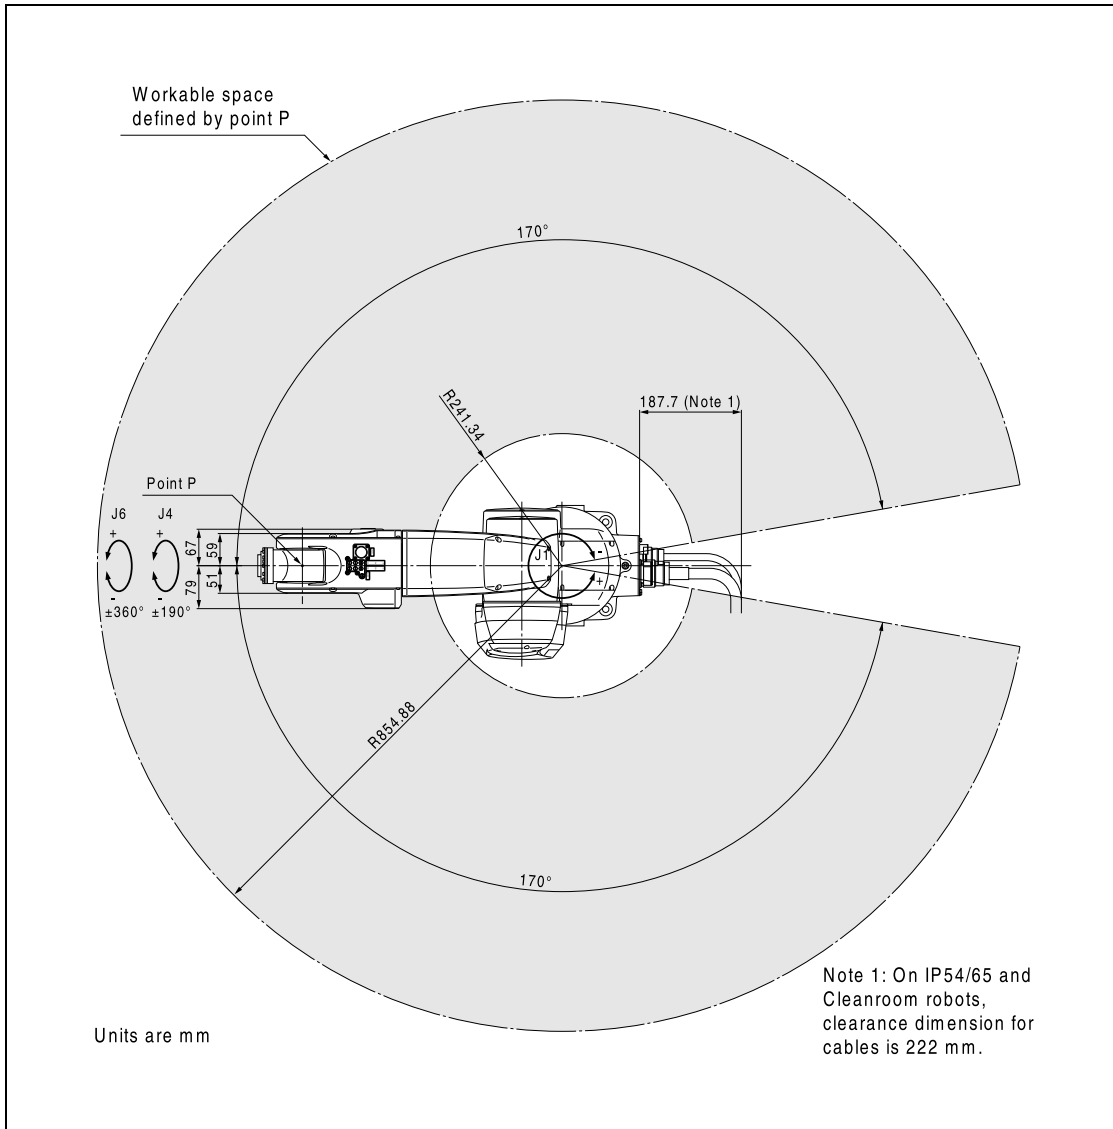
Viper 850 Top Dimensions and Work Envelope
